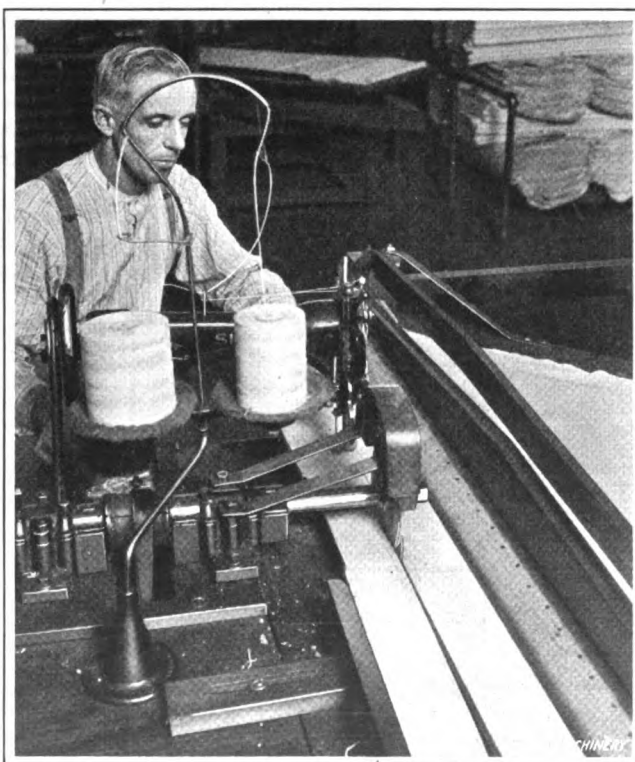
Sewing the Edges of Strips of Canvas together for Compress Polishing Wheels
